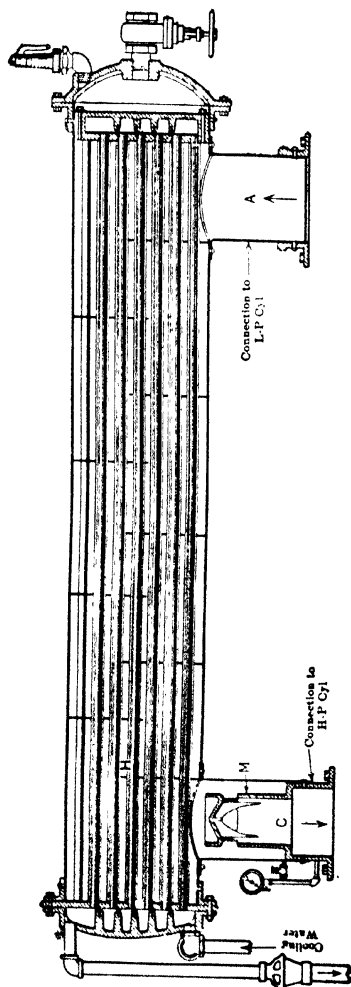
Ingersoll-Rand Intercooler, with Steel Shell and Cast-Iron Water Heads.
